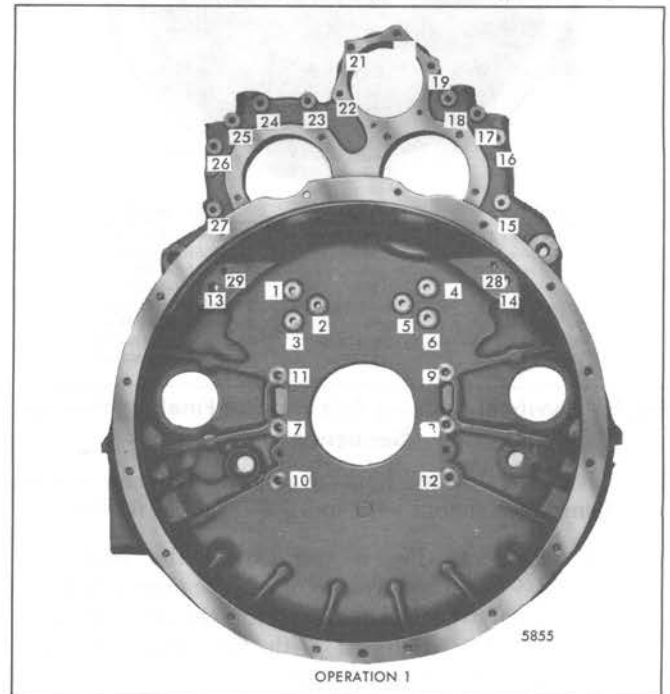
Flywheel Housing Bolt and Nut Tightening Sequence
